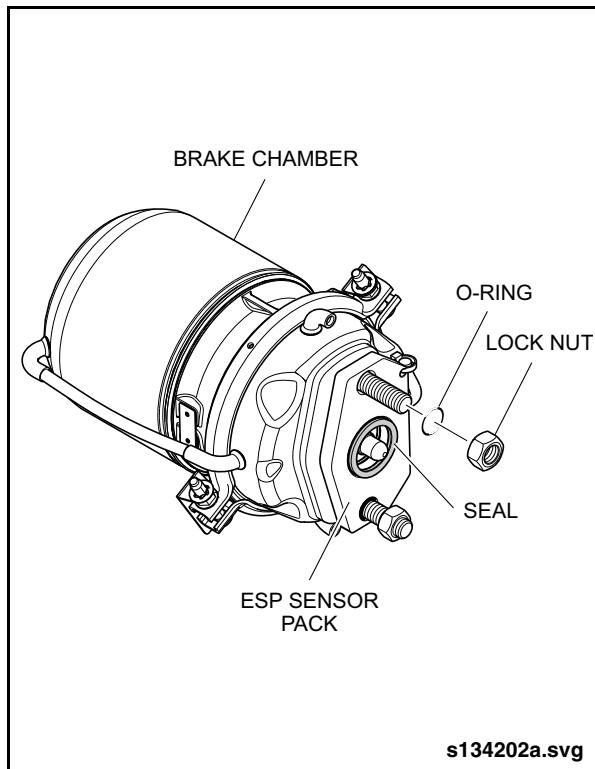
Rear Brake Chamber ESP Sensor Pack
